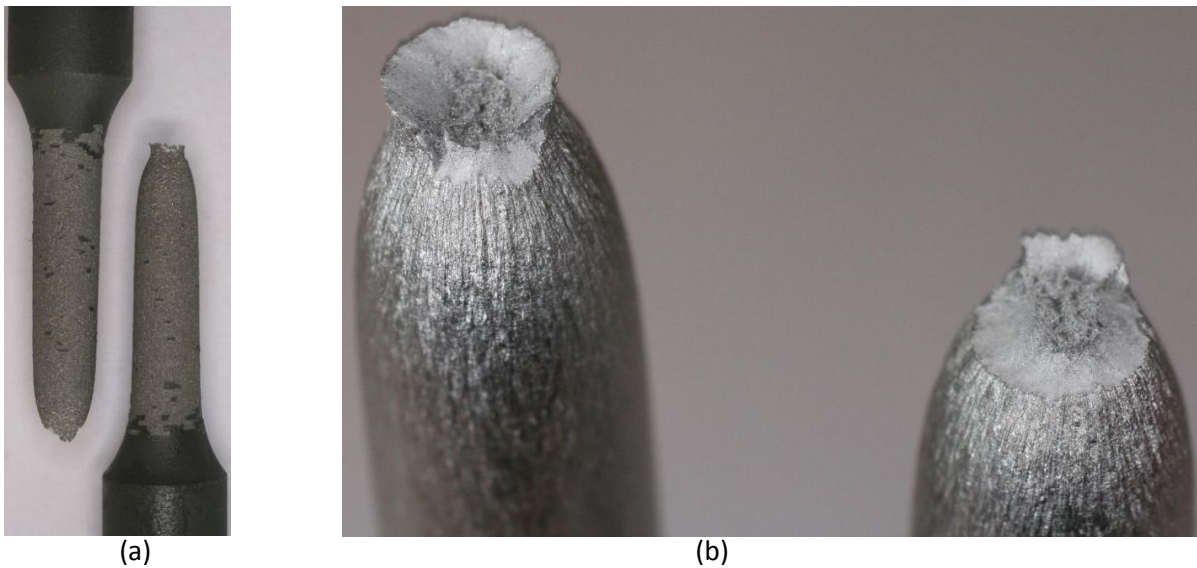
Photos of (a) the fractured HVOF tensile test specimen showing the crumbled tungsten carbide coating along the gauge length and (b) the fractured untreated duplex “cup and cone” surface of the tensile test specimens. The typical appearance of “cup and cone” as shown in (b) was present in all test specimens.
